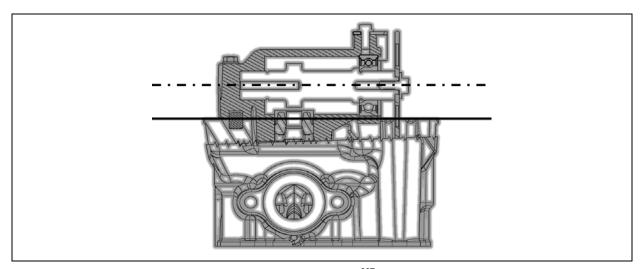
Split Plane Location of Cylinder Head (XY150)²⁰⁷
